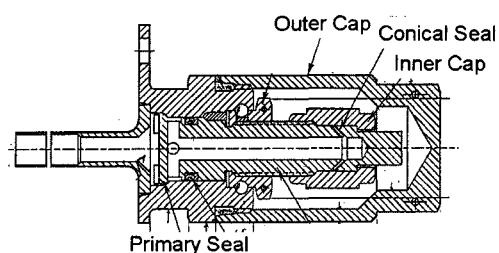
Fill/Drain Valve using Disk Type Primary Seal
